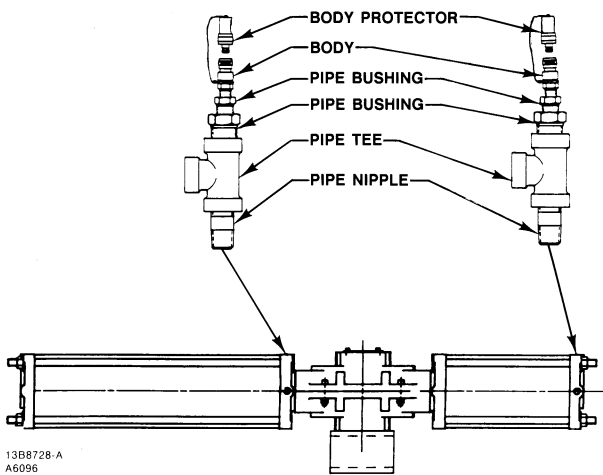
Type 1031 Piston Rotary Actuator (Fail Open, Model 33072)
